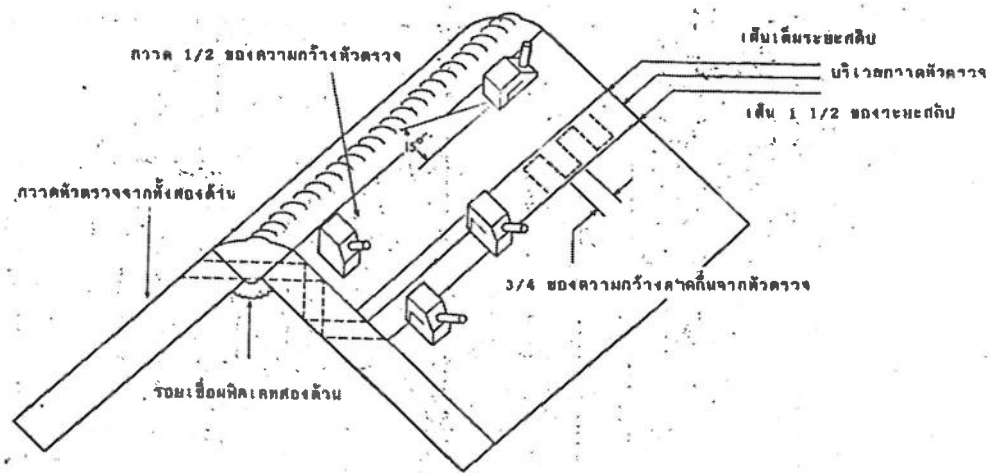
Techniques 10 and 11, for Inspecting Full-Penetration Double-Fillet Corner Welds
